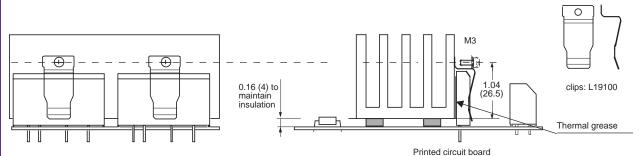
Clips with screws on standard heat sinks; dimensions in inches (mm)
